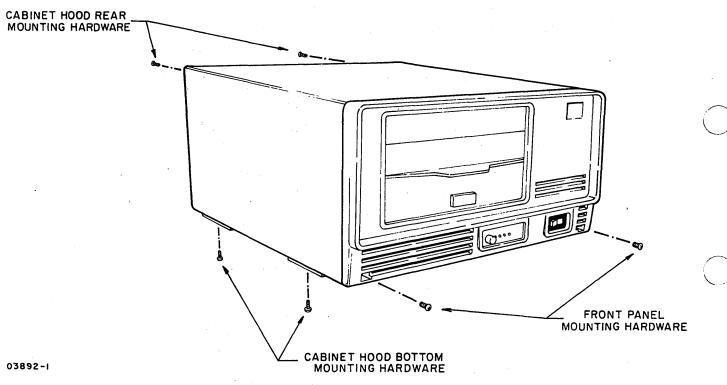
B-3. Front Panel and Cabinet Hood Mounting Details
